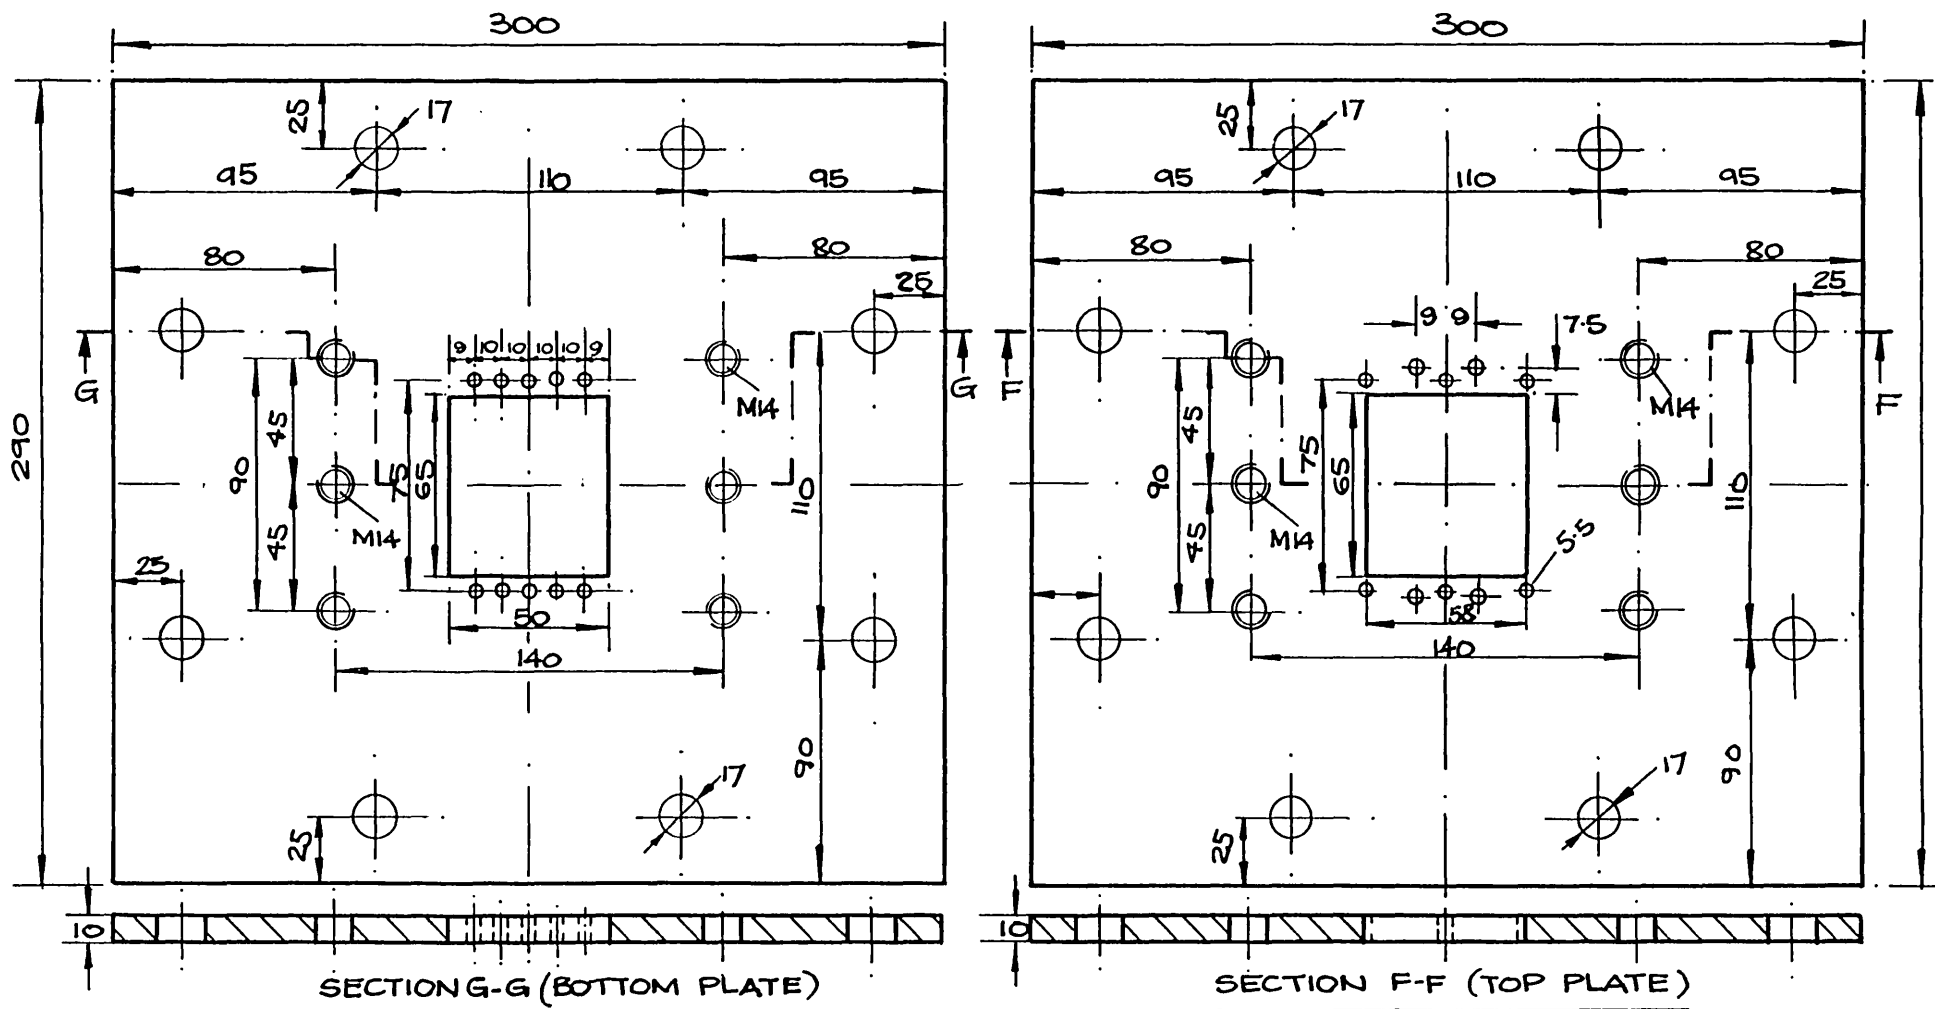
BASE PLATES OF THE TEST-SECTION.
